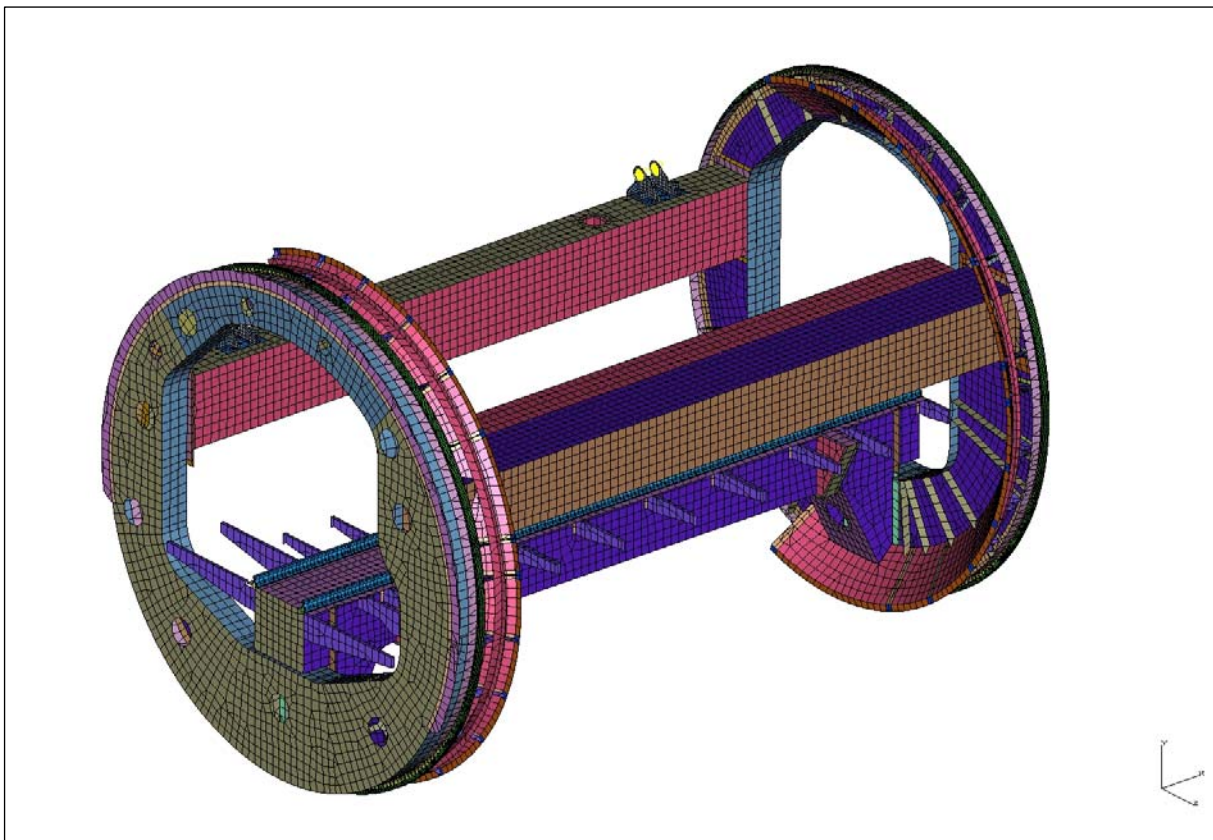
150 mm mesh applied to ingo cage assembly
